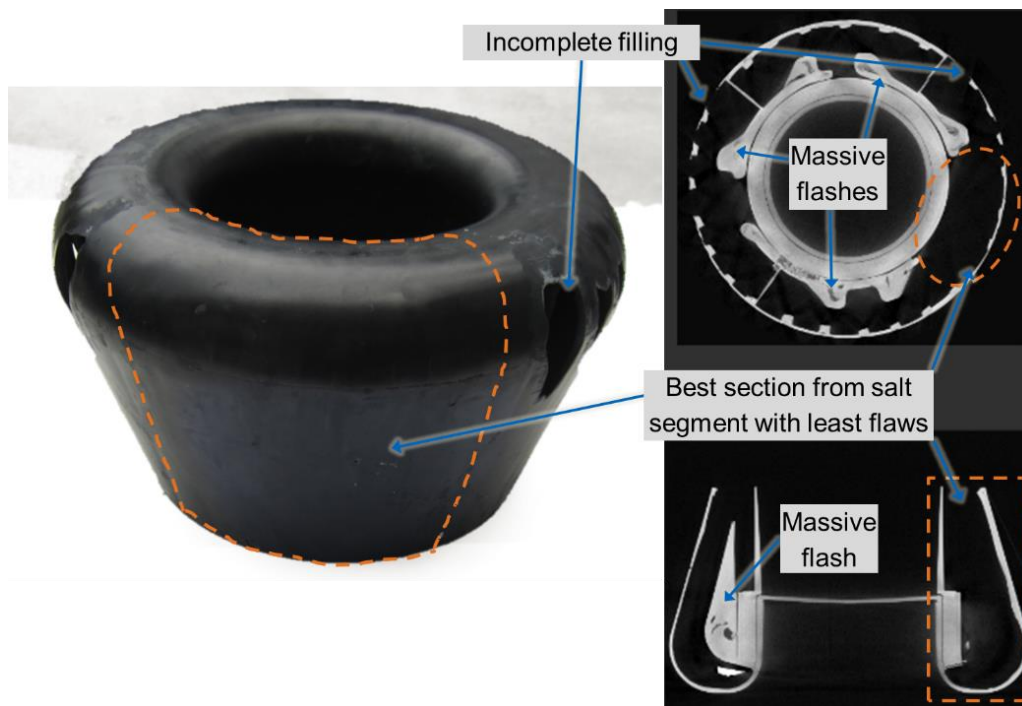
IMCoLoR demonstrator part KM13 with top and side view of its CT scan. The salt has been completely removed. The section highlighted by the dashed line shows the best geometric accuracy of all salt segments that were employed throughout the test series.
